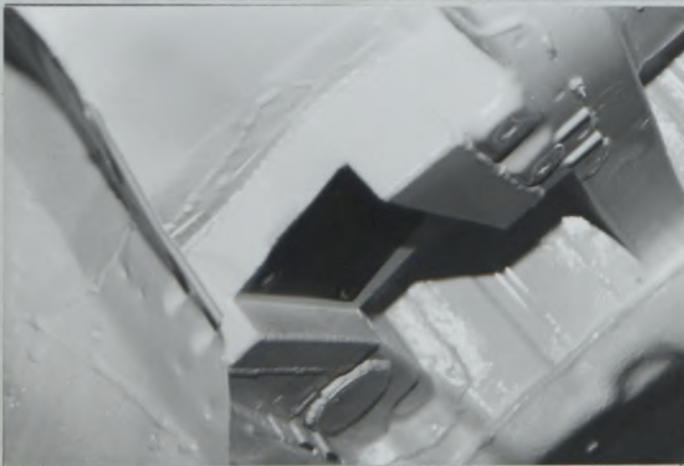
(HYDRAULIC HANDBRAKE ASSEMBLY)
